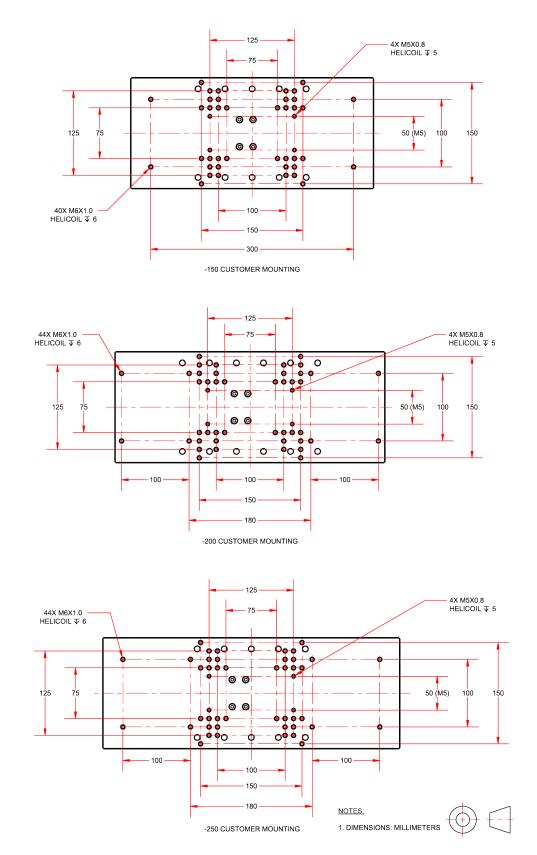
ATX165SL/SLE Mounting Dimensions
